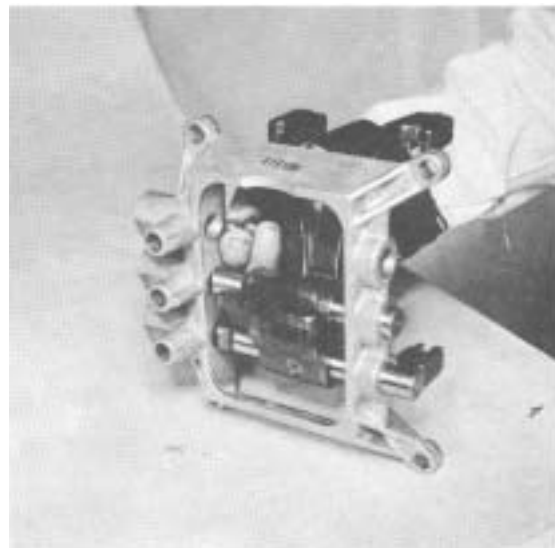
Install two interlock balls between the 2nd & 3rd, and 1st & Reverse shift rods.
